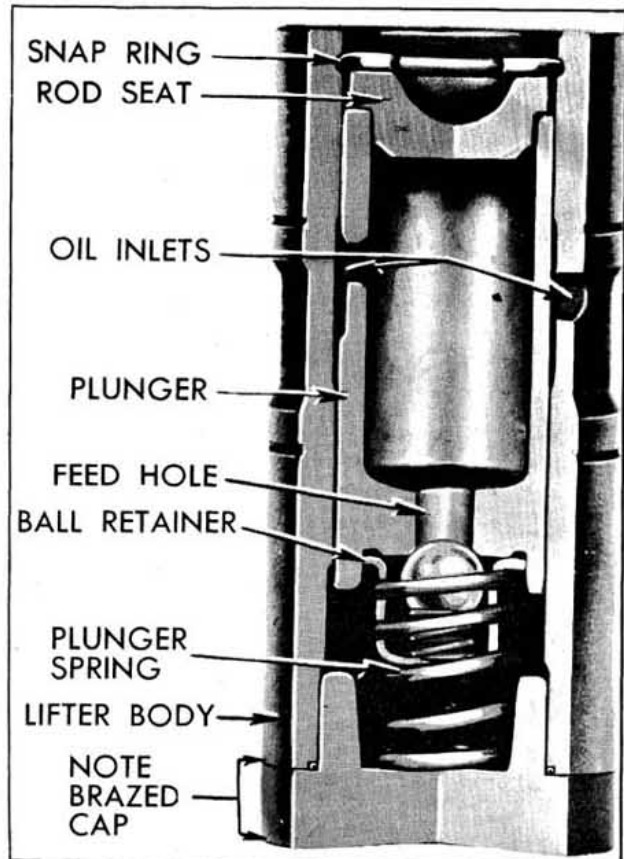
Hydraulic Valve Lifter Sectional View
